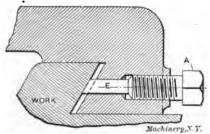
Means for Holding Work against Locating Side of Dove-tail Slide of Boring Jig in Fig. 126
